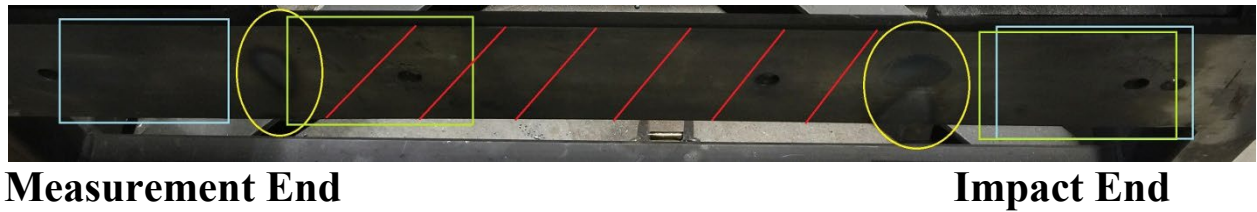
The Bench Bearing Support Plate (2921-313) depicting the area of bowing (red hashed lines), location of Lower Anchor Support Plate Spacer Bars (2921-712) welds (yellow ovals), and current location of the bearings for NHTSA/VRTC (green rectangles) and KCS (blue rectangles)
